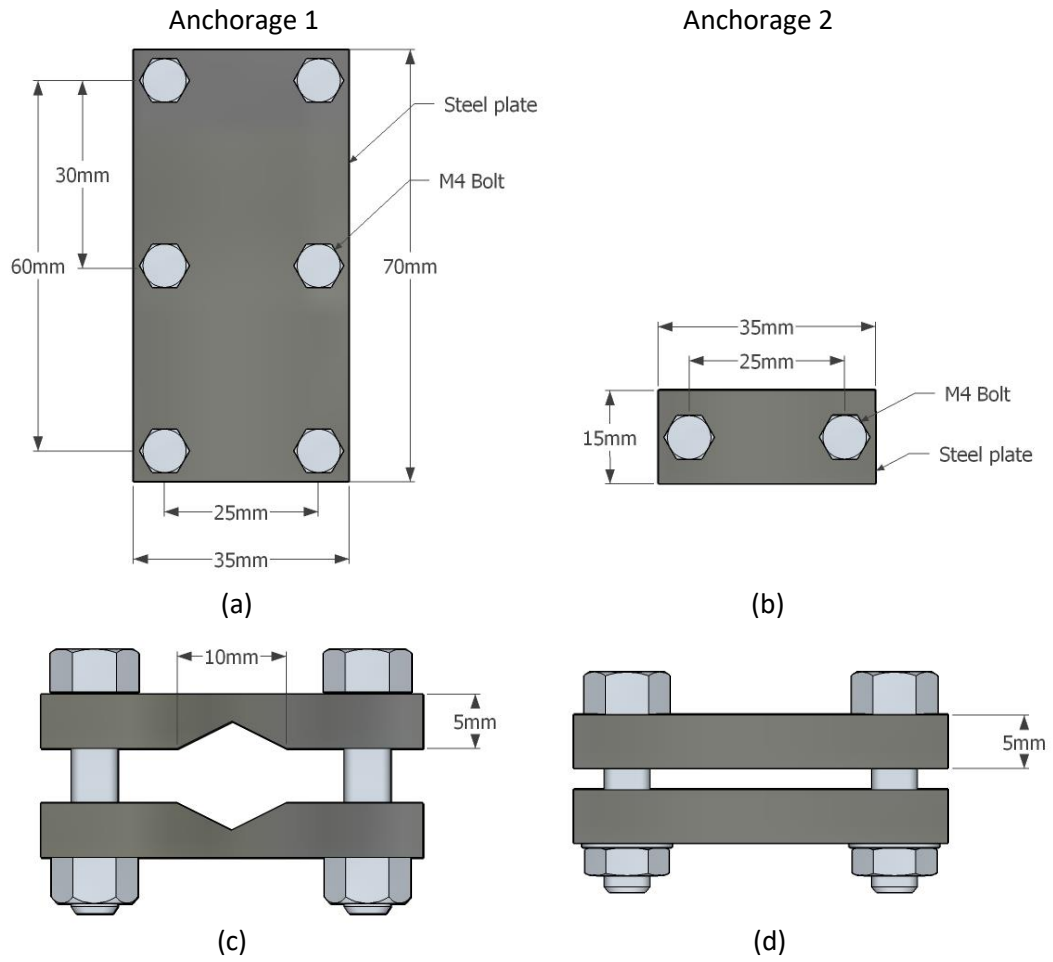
Schematic drawings of anchorage 1 (a) plan view and (c) end view; anchorage 2 (b) plan view and (d) end view.
